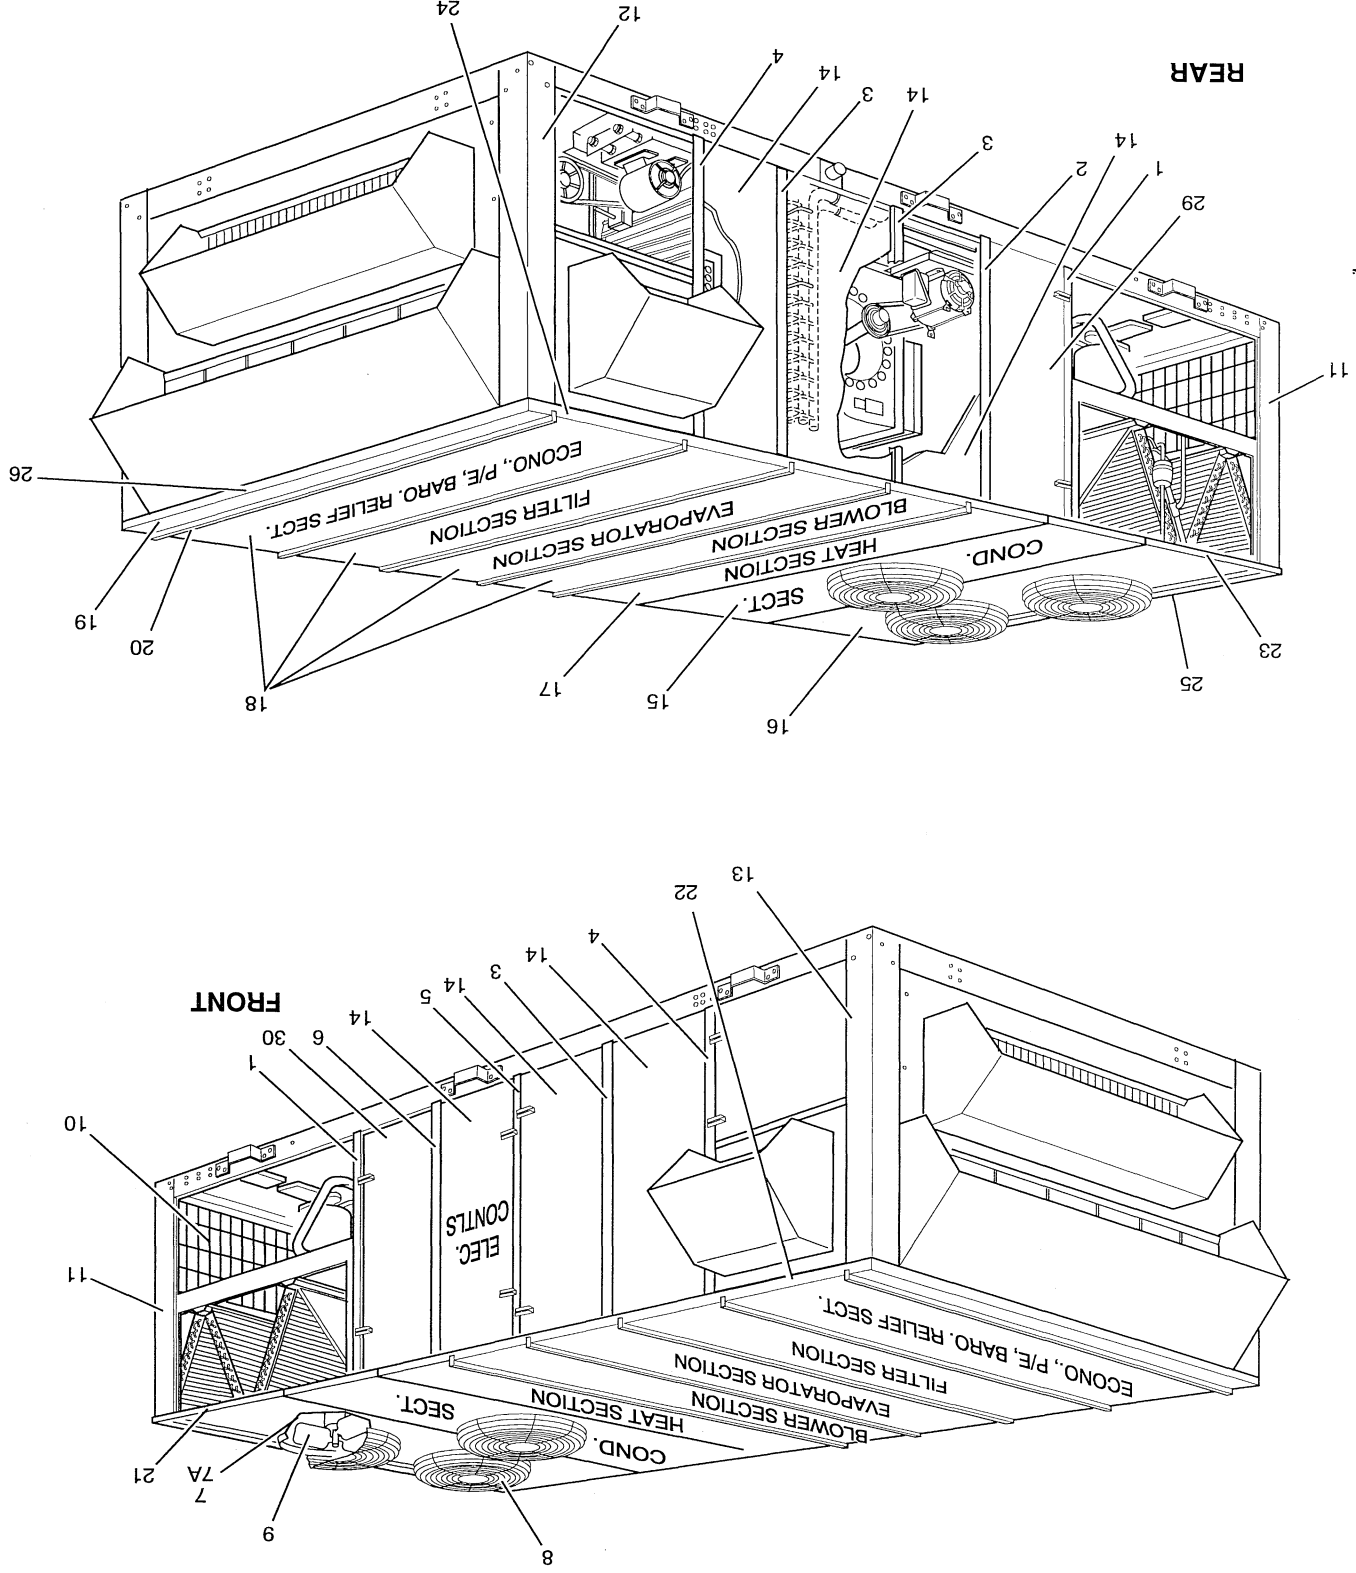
UNIT SECTIONS & COMMON PARTS
